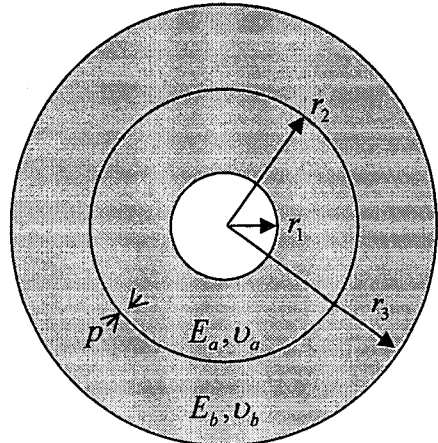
(a) Contact pressure acting equal on both gear and shaft by shrink fitting process
